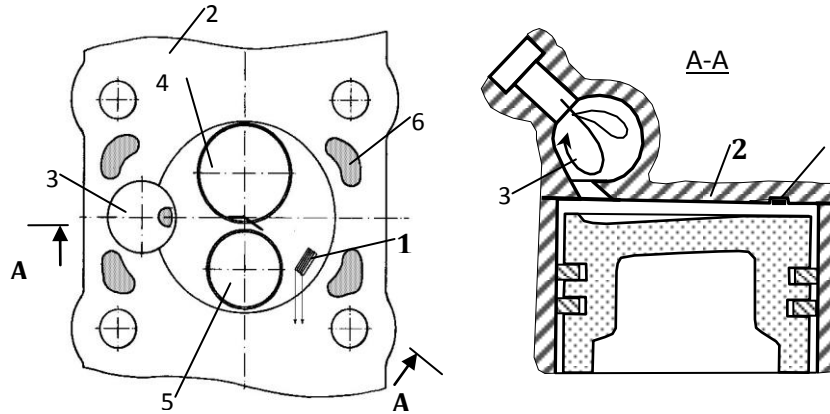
Scheme and cross – sectional view of cylinder head with mounted GHFS on it. 1 – GHFS, 2 – cylinder head, 3 – the vortex chamber, 4 – intake valve, 5 – exhaust valve, 6 – channels of cooling system.
